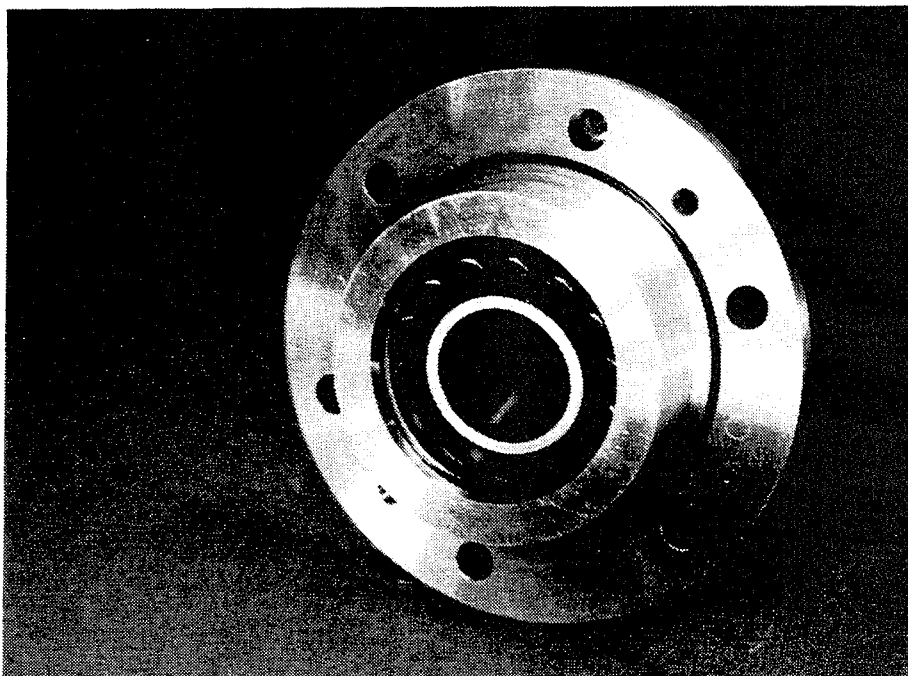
CRANKSHAFT END SUPPORT BEARING AND HOUSING
